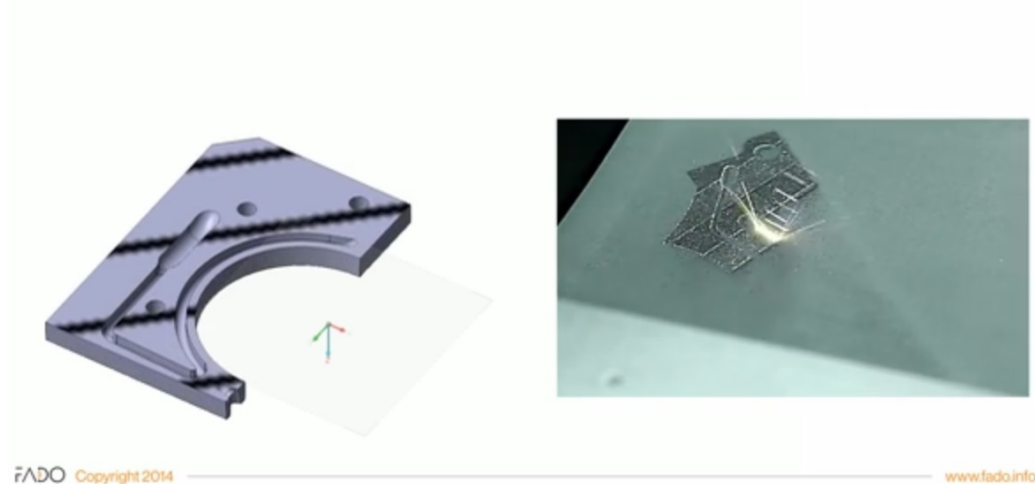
DMLS manufacture of the mould slider showing the cooling channels and holes for ejector pins. (<http://www.eos.info/tooling>)
